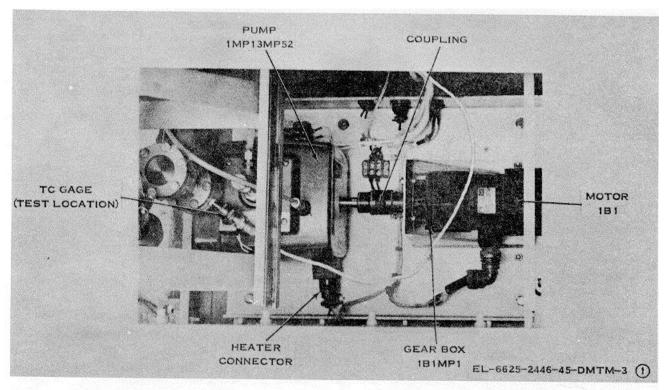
(1). Vacuum pump group unit 1, parts location (part 1 of 3).
